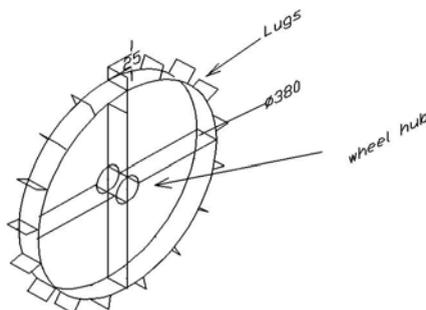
Isometric view of ground wheel of developed bullock drawn dry paddy seed cum fertilizer drill
